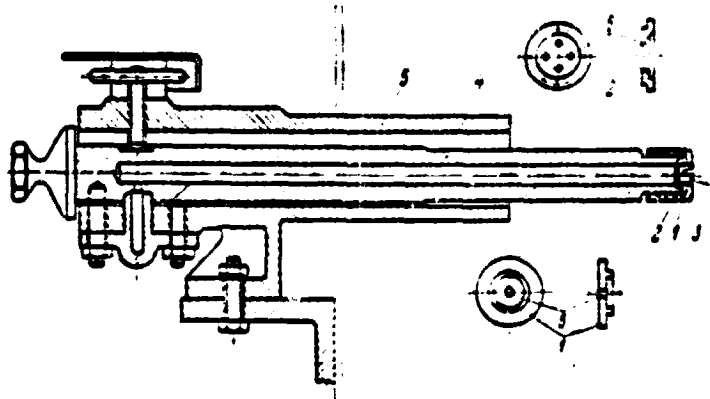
Mechanical spray nozzle installed aboard "Metro-Vickers" trains.
